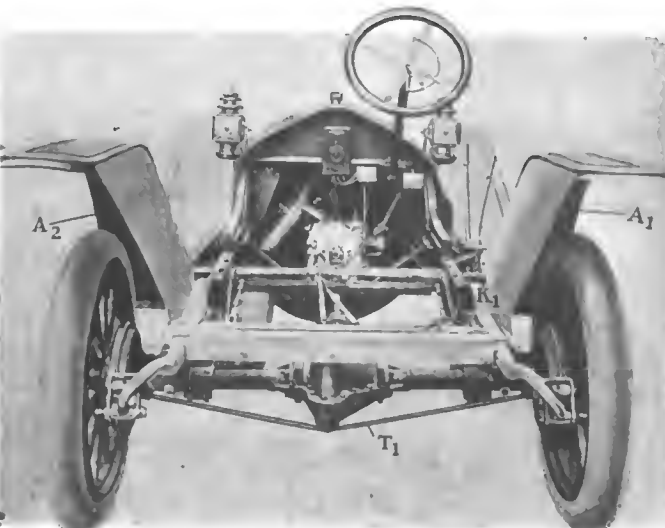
Rear view of car, presenting live rear axle, method of trussing, and general accessibility with facilities for getting at bevel drive.
